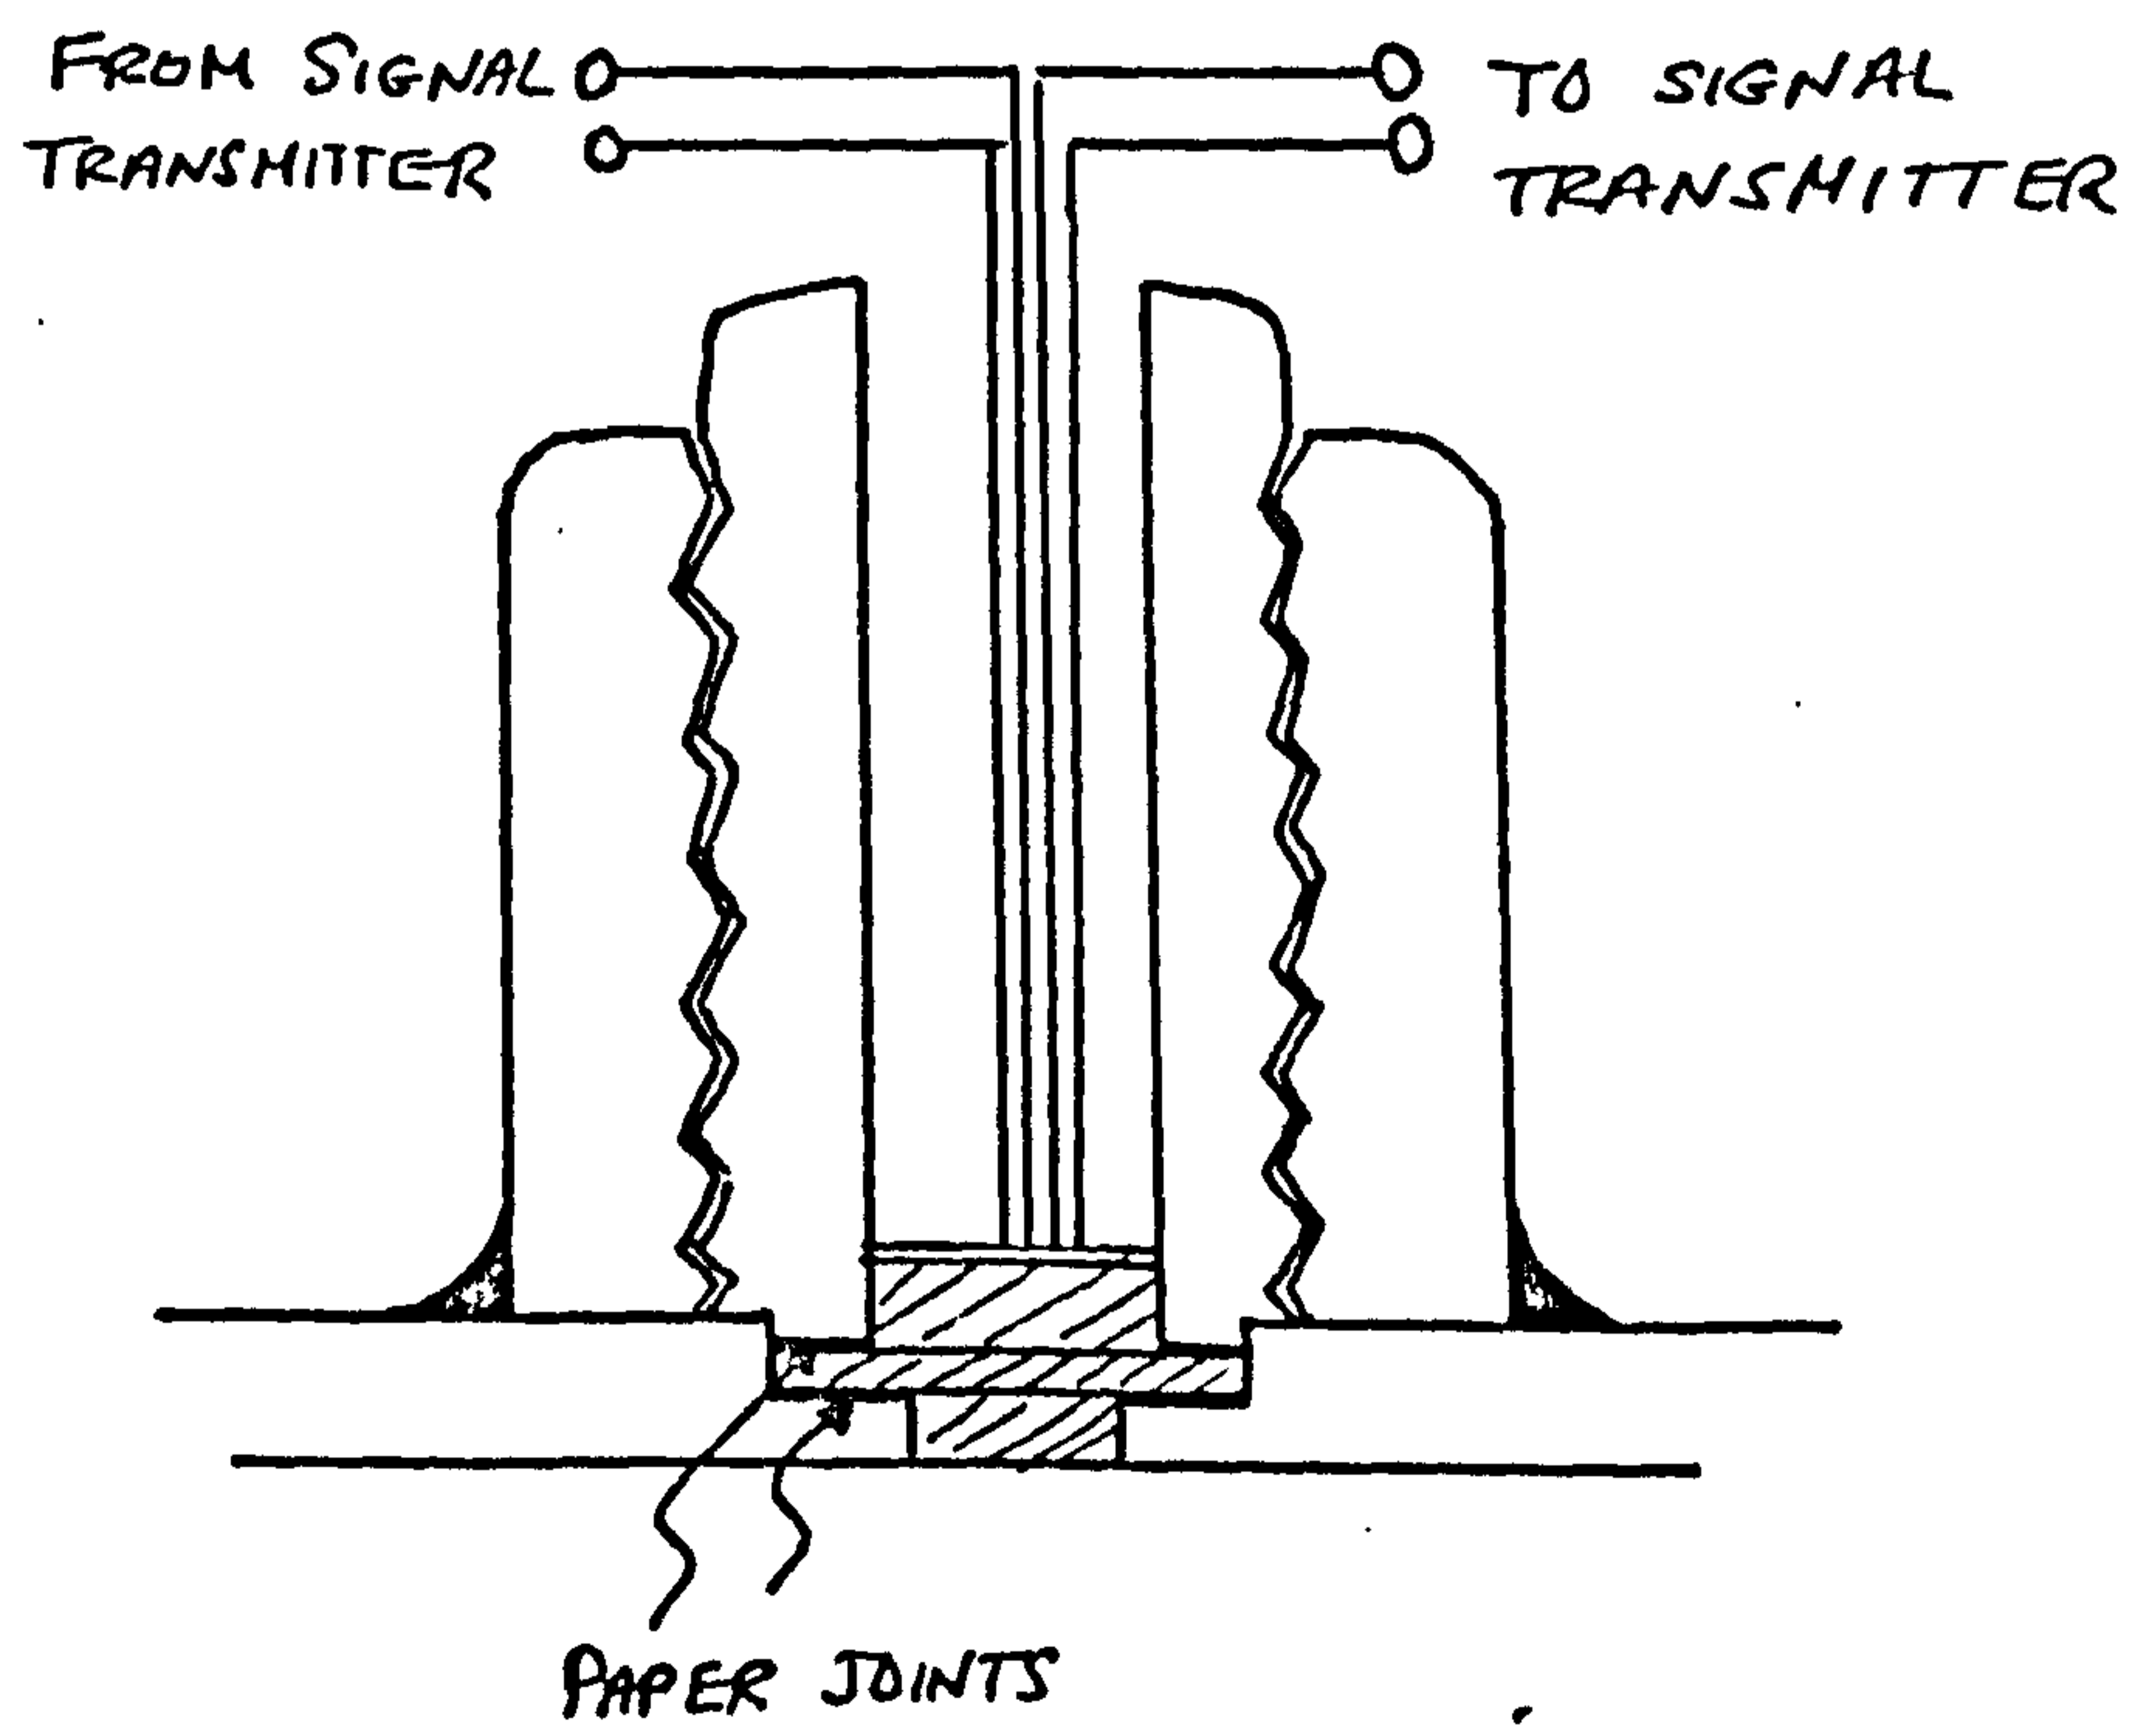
TRANSDUCER BOSS ASSEMBLY
